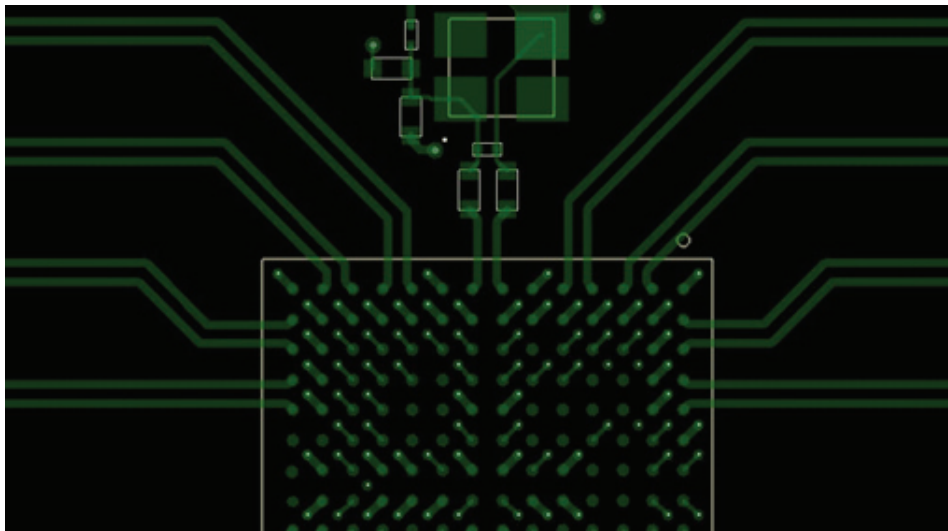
GS12070 Layout Example (high-speed lines top layer)
